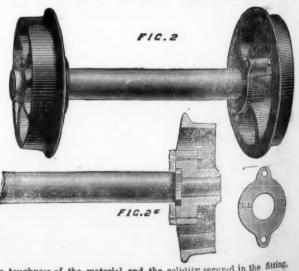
and 1a show a longitudinal view and plan of a pair of corf wheels and axles fitted up for out-side bearings, and Figs. 2 and 2a for inside bearings. A A are the wheels; B, is the axle; CC, the washers; D D, the bolts; E, the collar on axle B;
